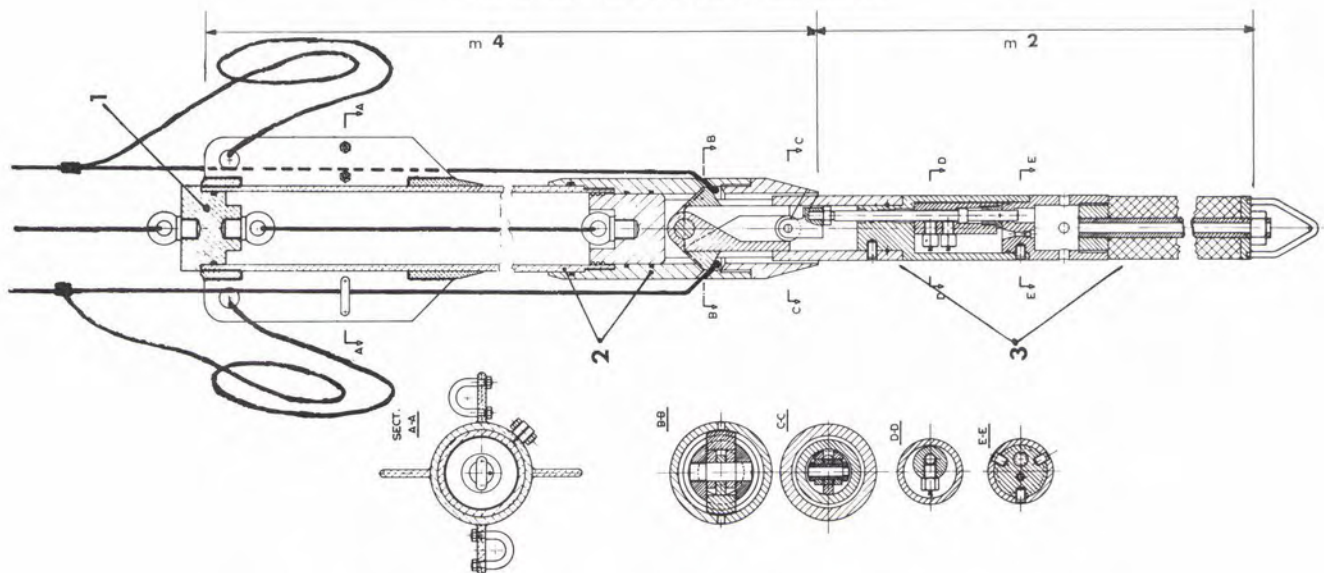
Mechanical Parts of the Full Scale Hydrostatic Corer - Drawing
